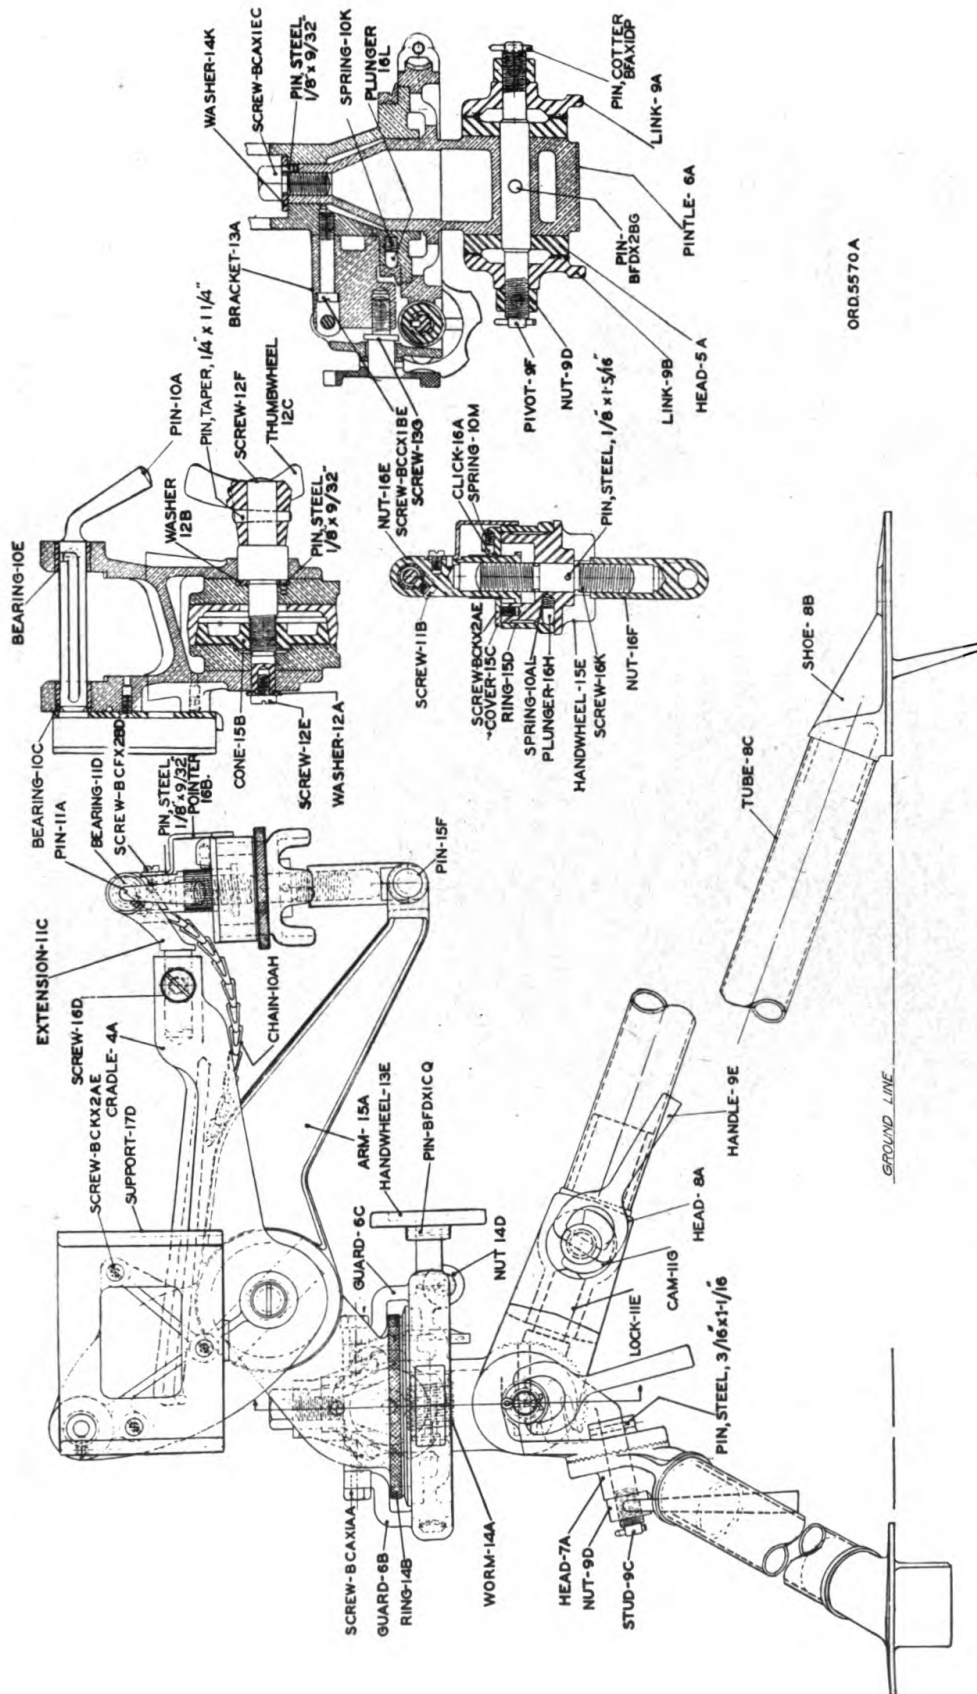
Machine-gun tripod mount, caliber .30, M1917A1.
